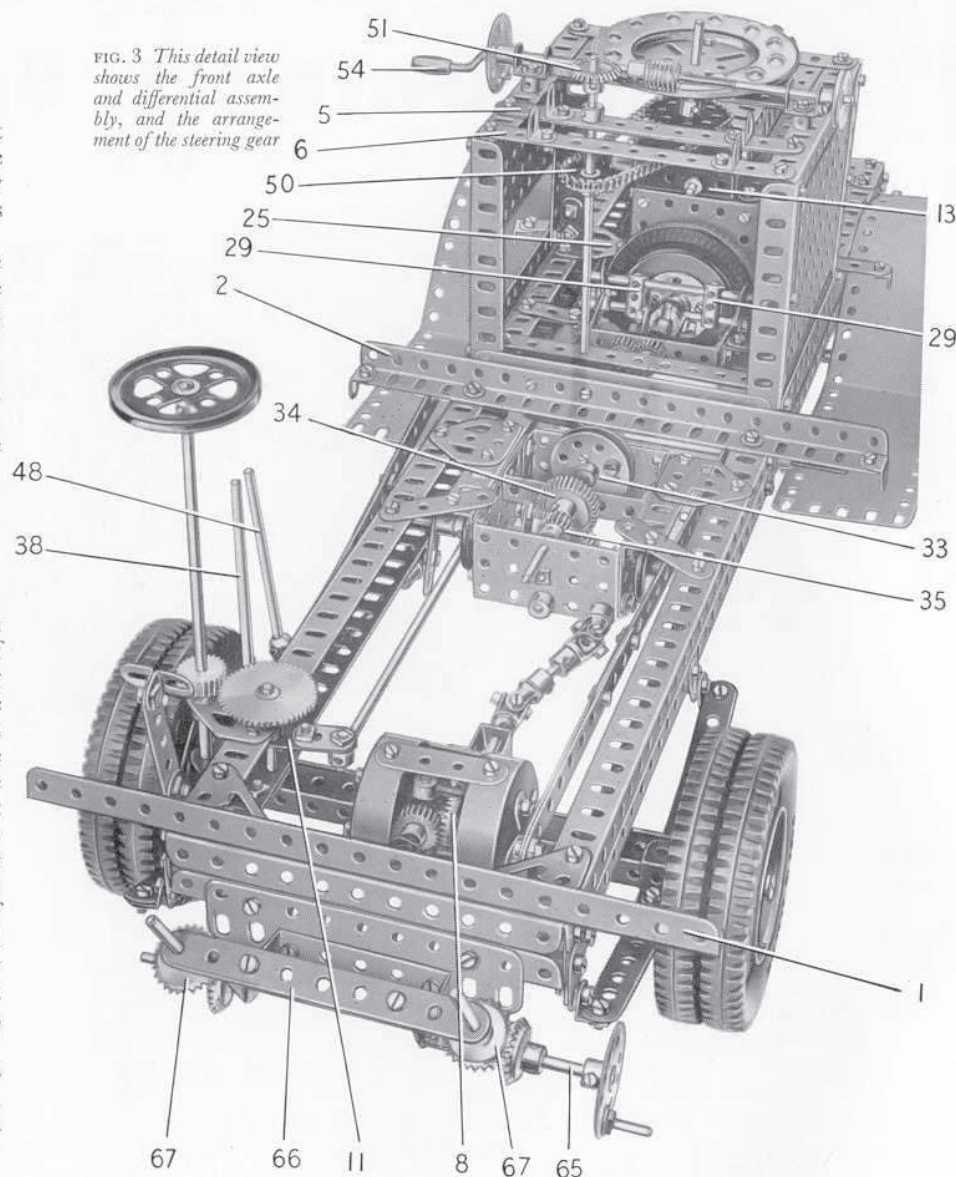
This detail view shows the front axle and differential assembly, and the arrangement of the steering gear
